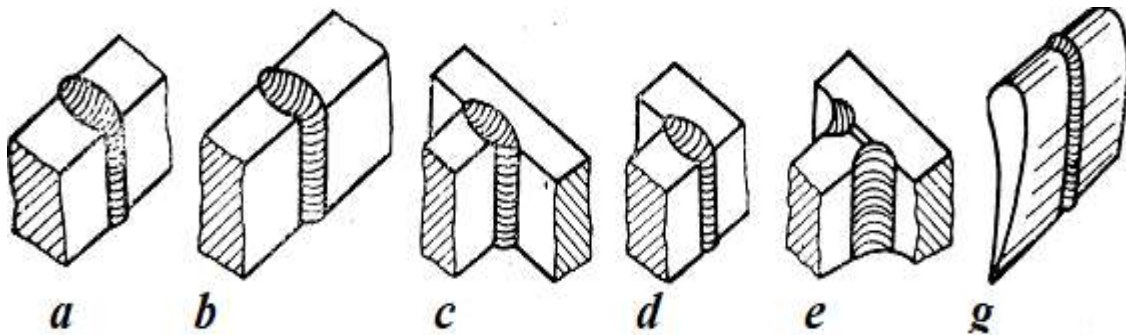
The main types of welded joints performed by electroslag welding:
